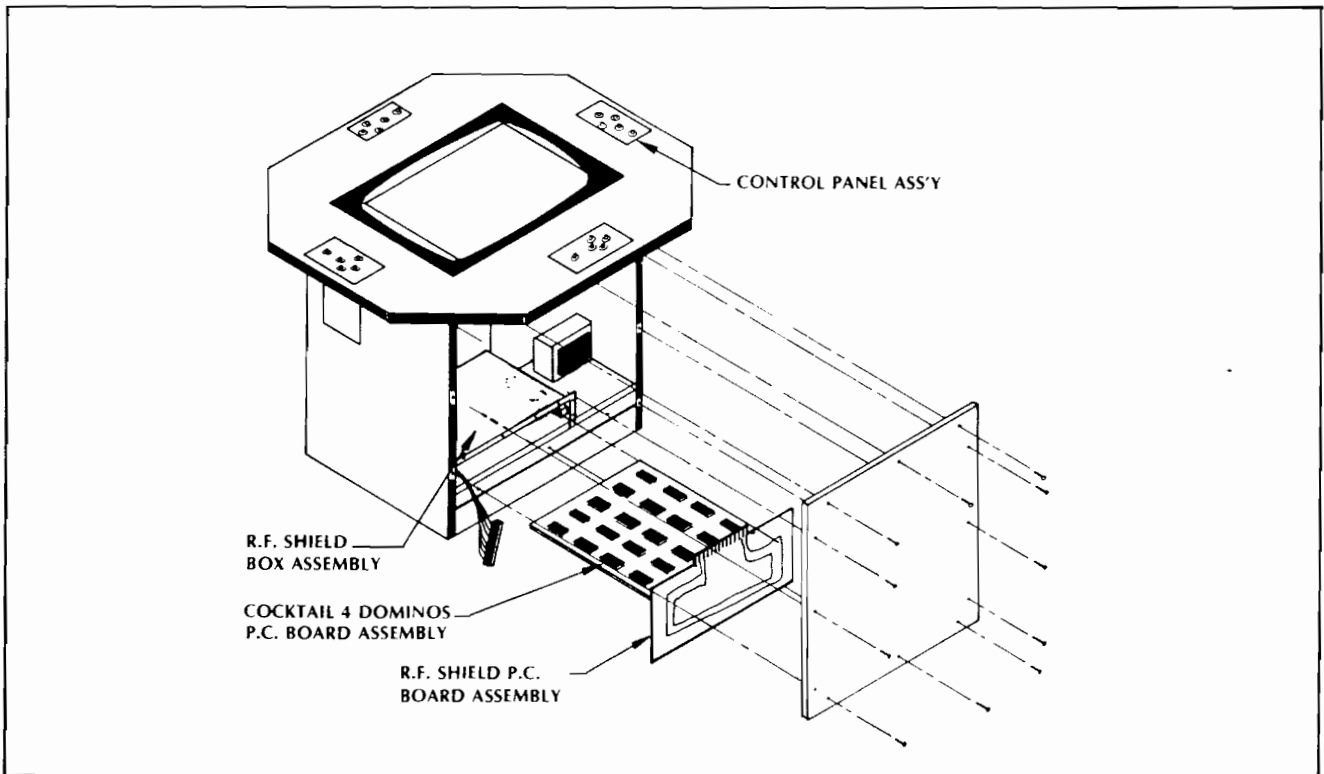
B Exploded Diagram, Rear View (Cocktail Model Only)
